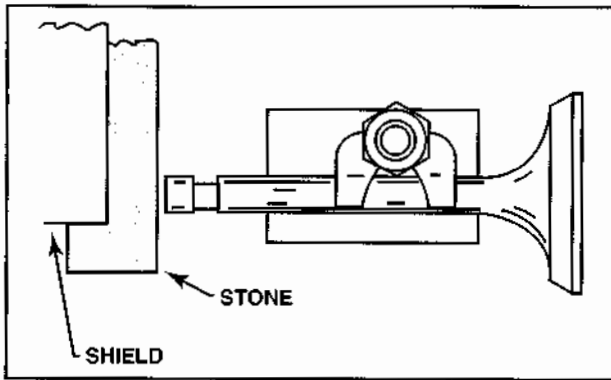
To accurately grind a valve tip, the valve must be held securely in place and be aligned perpendicular to the side of the grinding stone.
